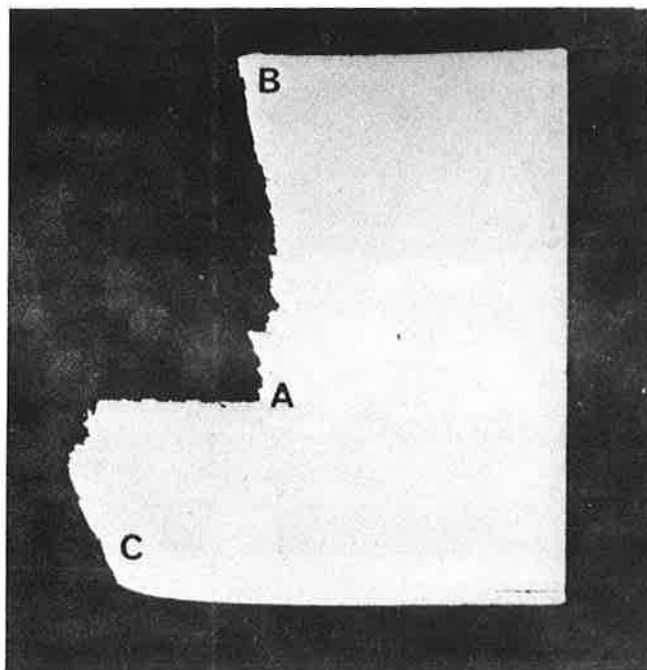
A thickness profile of the fracture area shown in Figure 12. A, brittle crack region; B, the outside surface of the plate; C, the inside surface of the plate.
